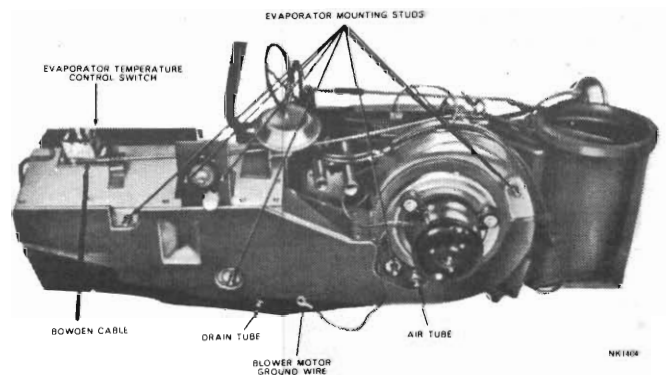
Heater and evaporator assembly — engine side (typical view)
